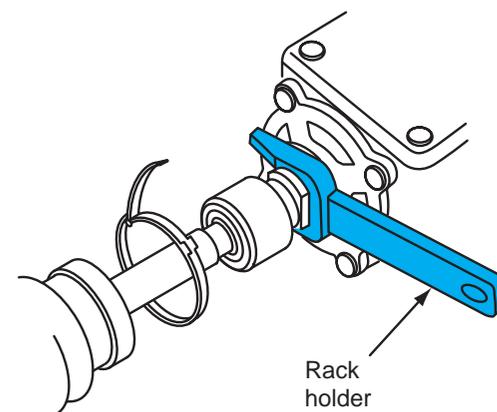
Installing the special rack holding tool between the actuator housing and the stop washer.
